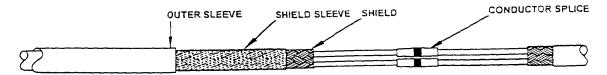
Single Shield Cable Repair with Solder Sleeve Primary Splice (Sheet 1 of 3)
